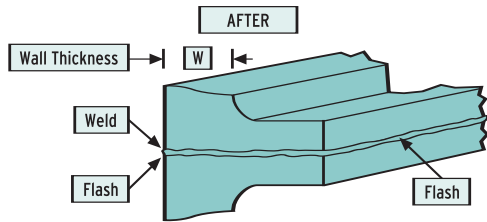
15 Vibration Welding Common Butt Joint Design with Flash Design
